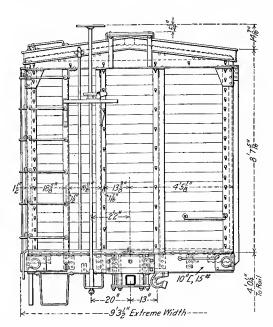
Cross Sections and End Elevation of Canadian Pacific Steel Frame Box Car Shown in Figs. 6 and 267.
